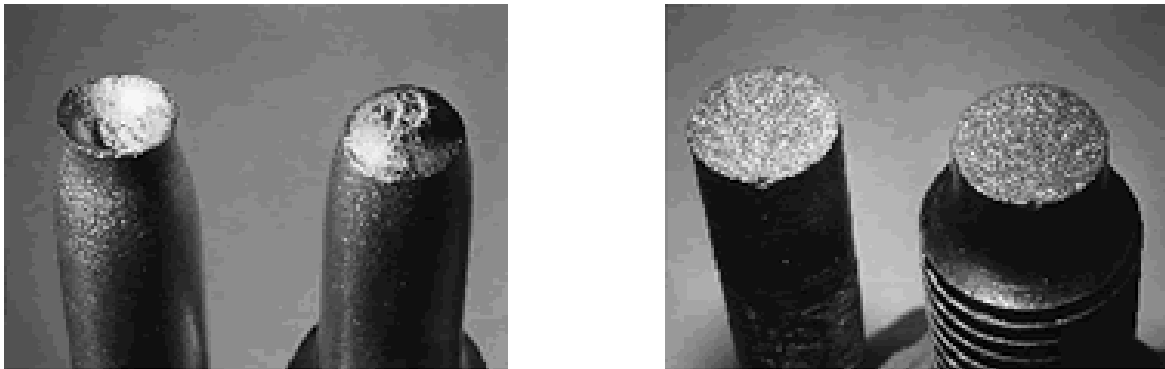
The fracture surface of a ductile fracture surface to the left and a brittle fracture surface to the right [11].
